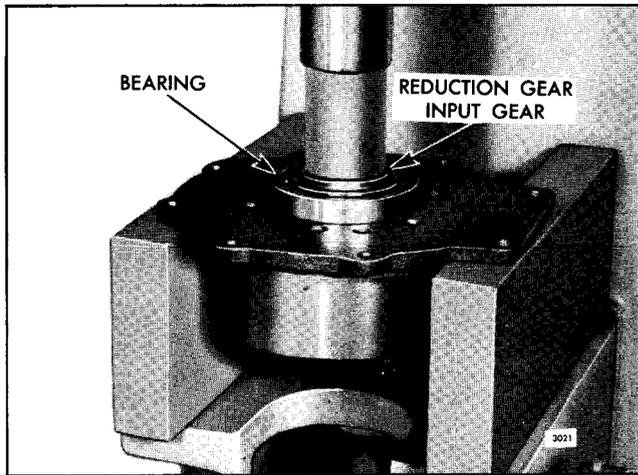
Removing Reduction Gear Input Gear from Input Gear Bearing (1.5:1 Ratio)
